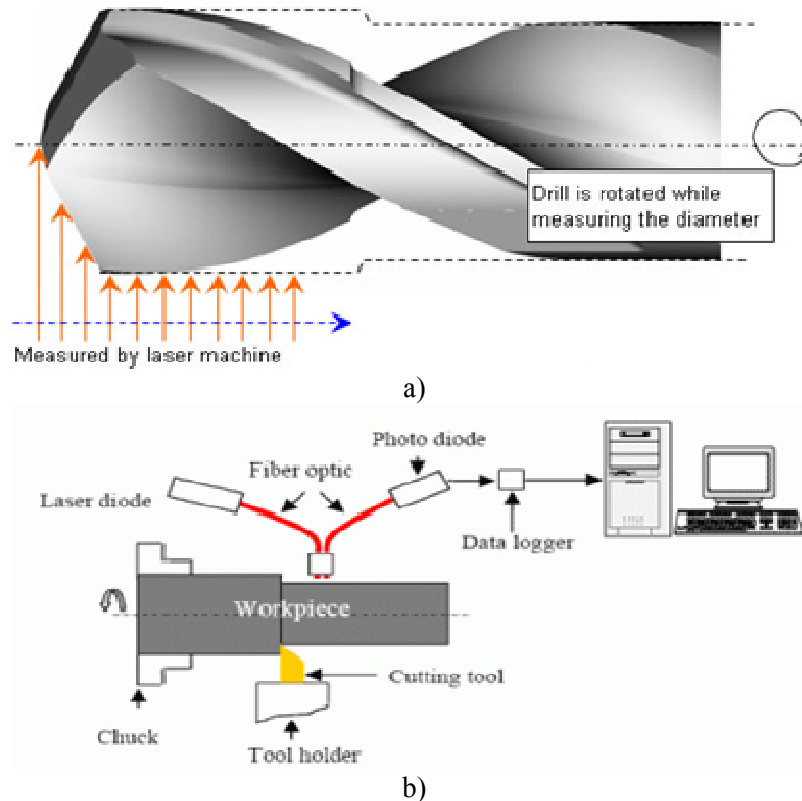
Laser beams for geometry control of: a) drill bit and b) set-up diagram during machining
